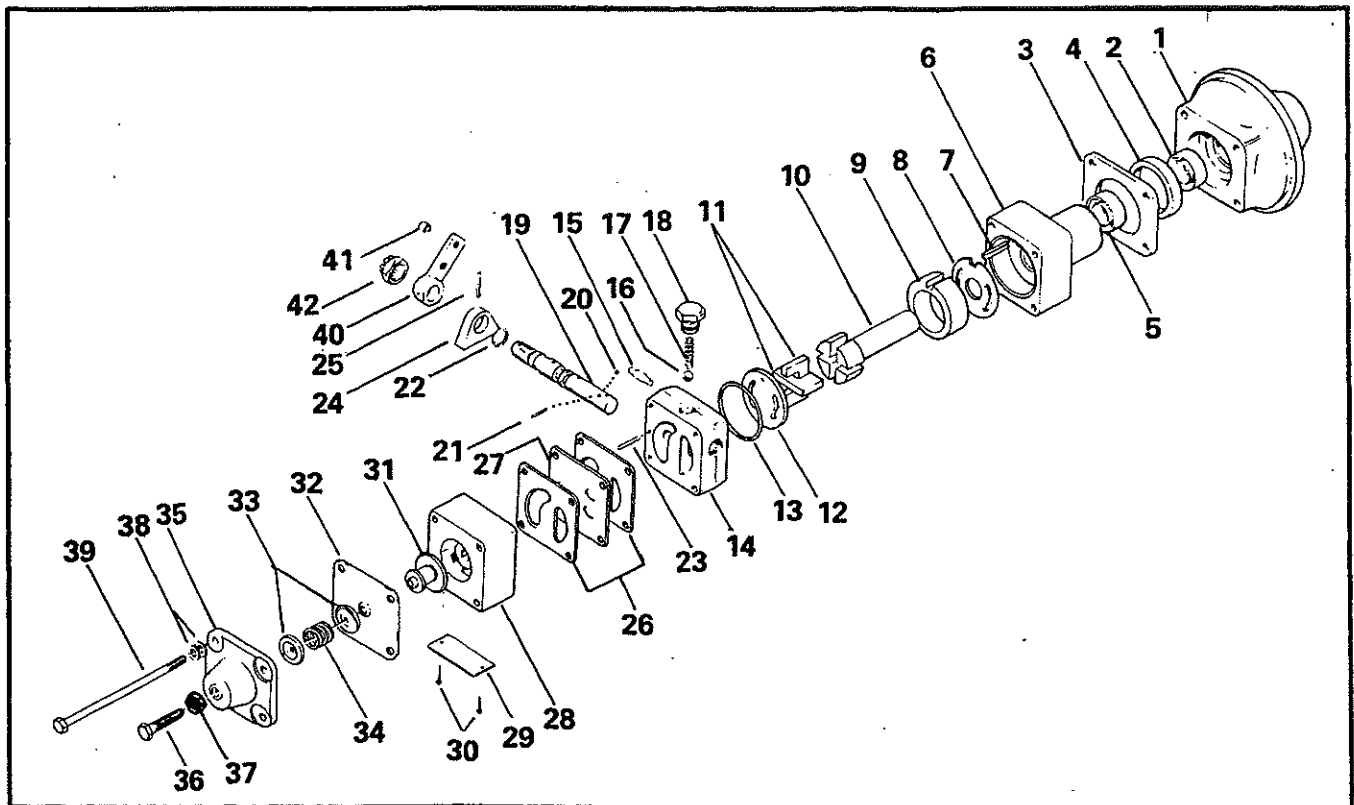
FUEL PUMP ASSEMBLY.
